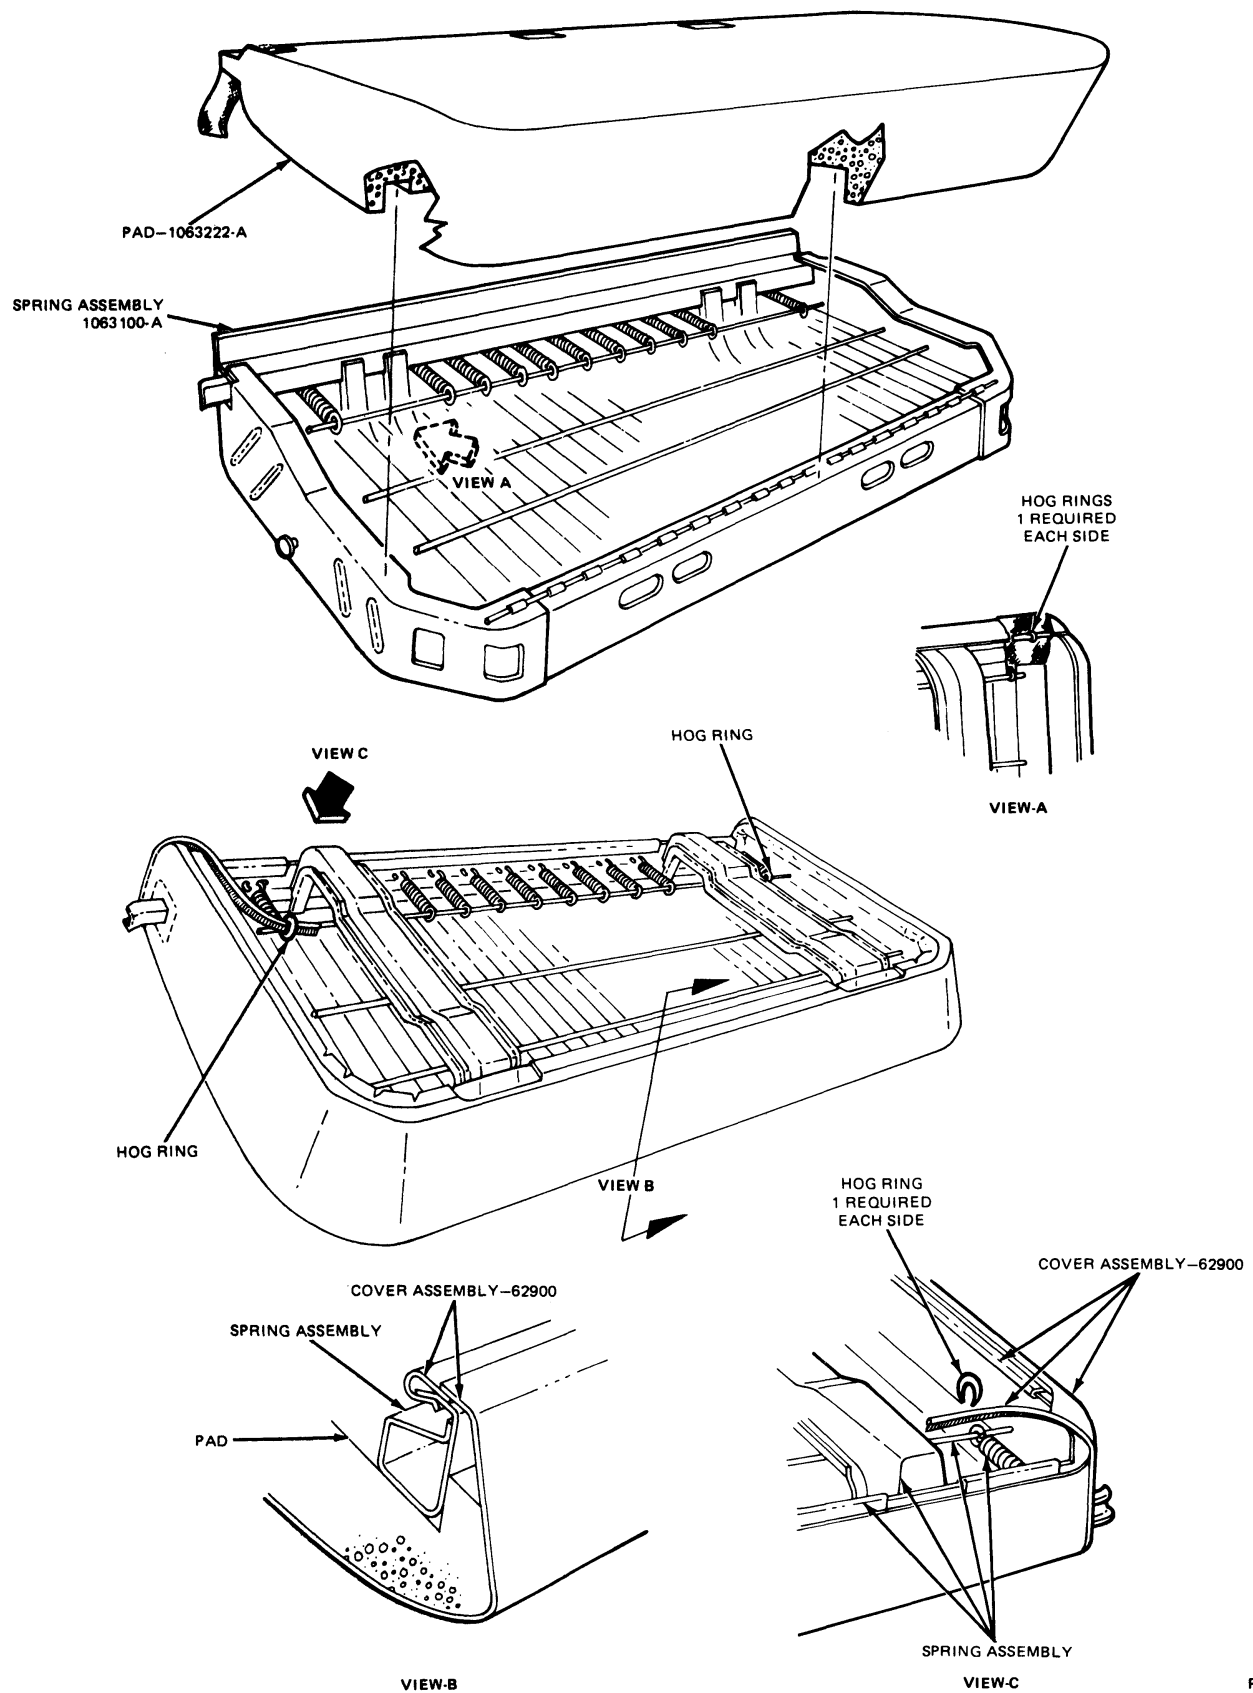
Front Seat Back Frame, Pad and Cover—F-Series, Super Cab and Bronco
